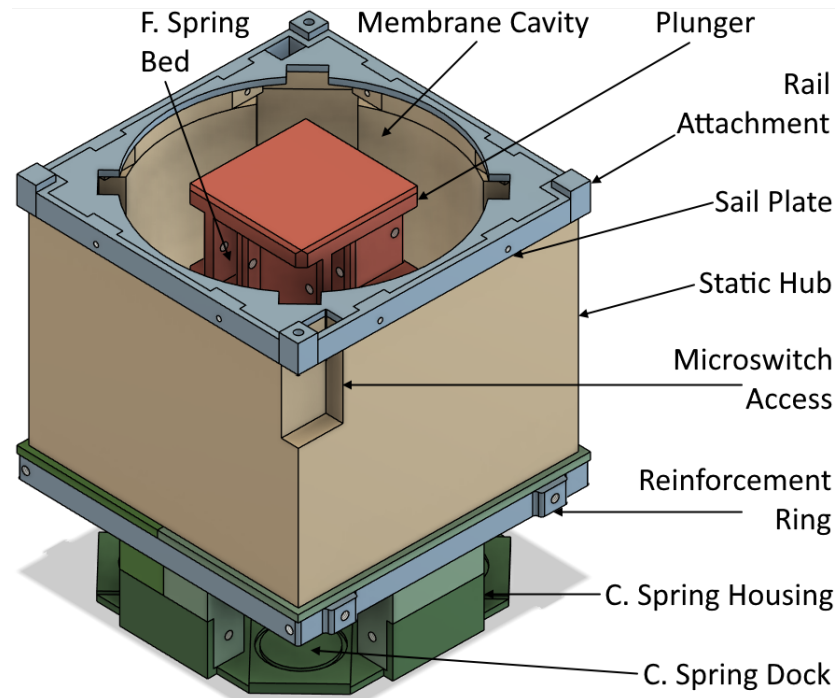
Stowed Sail Payload Annotated without Flat Springs, Compression Springs or Motor Assembly
